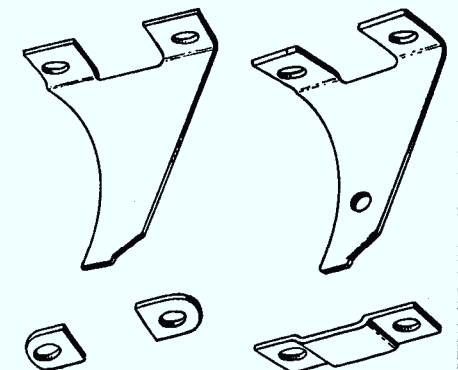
A — New type oil distributor at right is identified by hole drilled through it as shown. One piece rod lock shown below new type distributor should be used only with new distributor; two-piece rod lock should be used with old type distributor. Refer to text.
